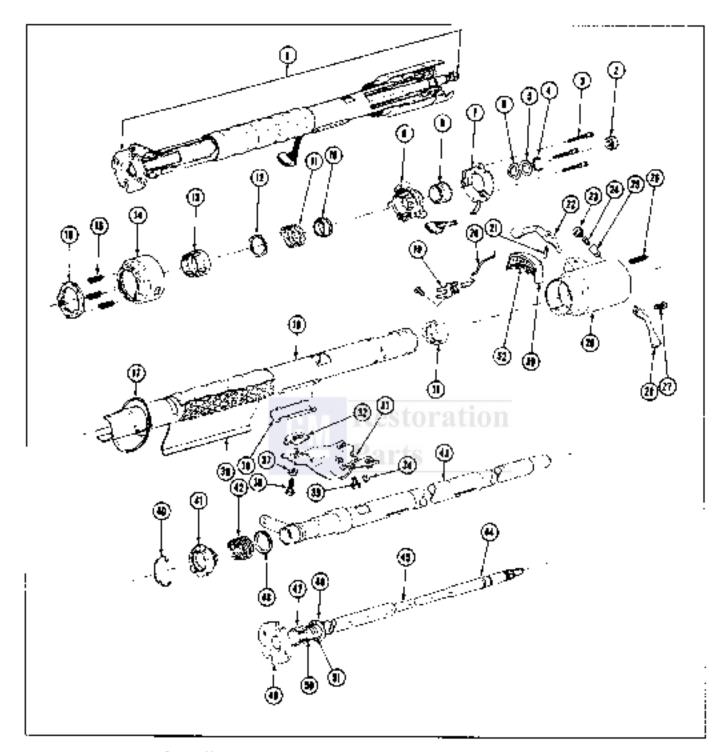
Expladed View of Typical Regular Calumn - Automatic Transmission
